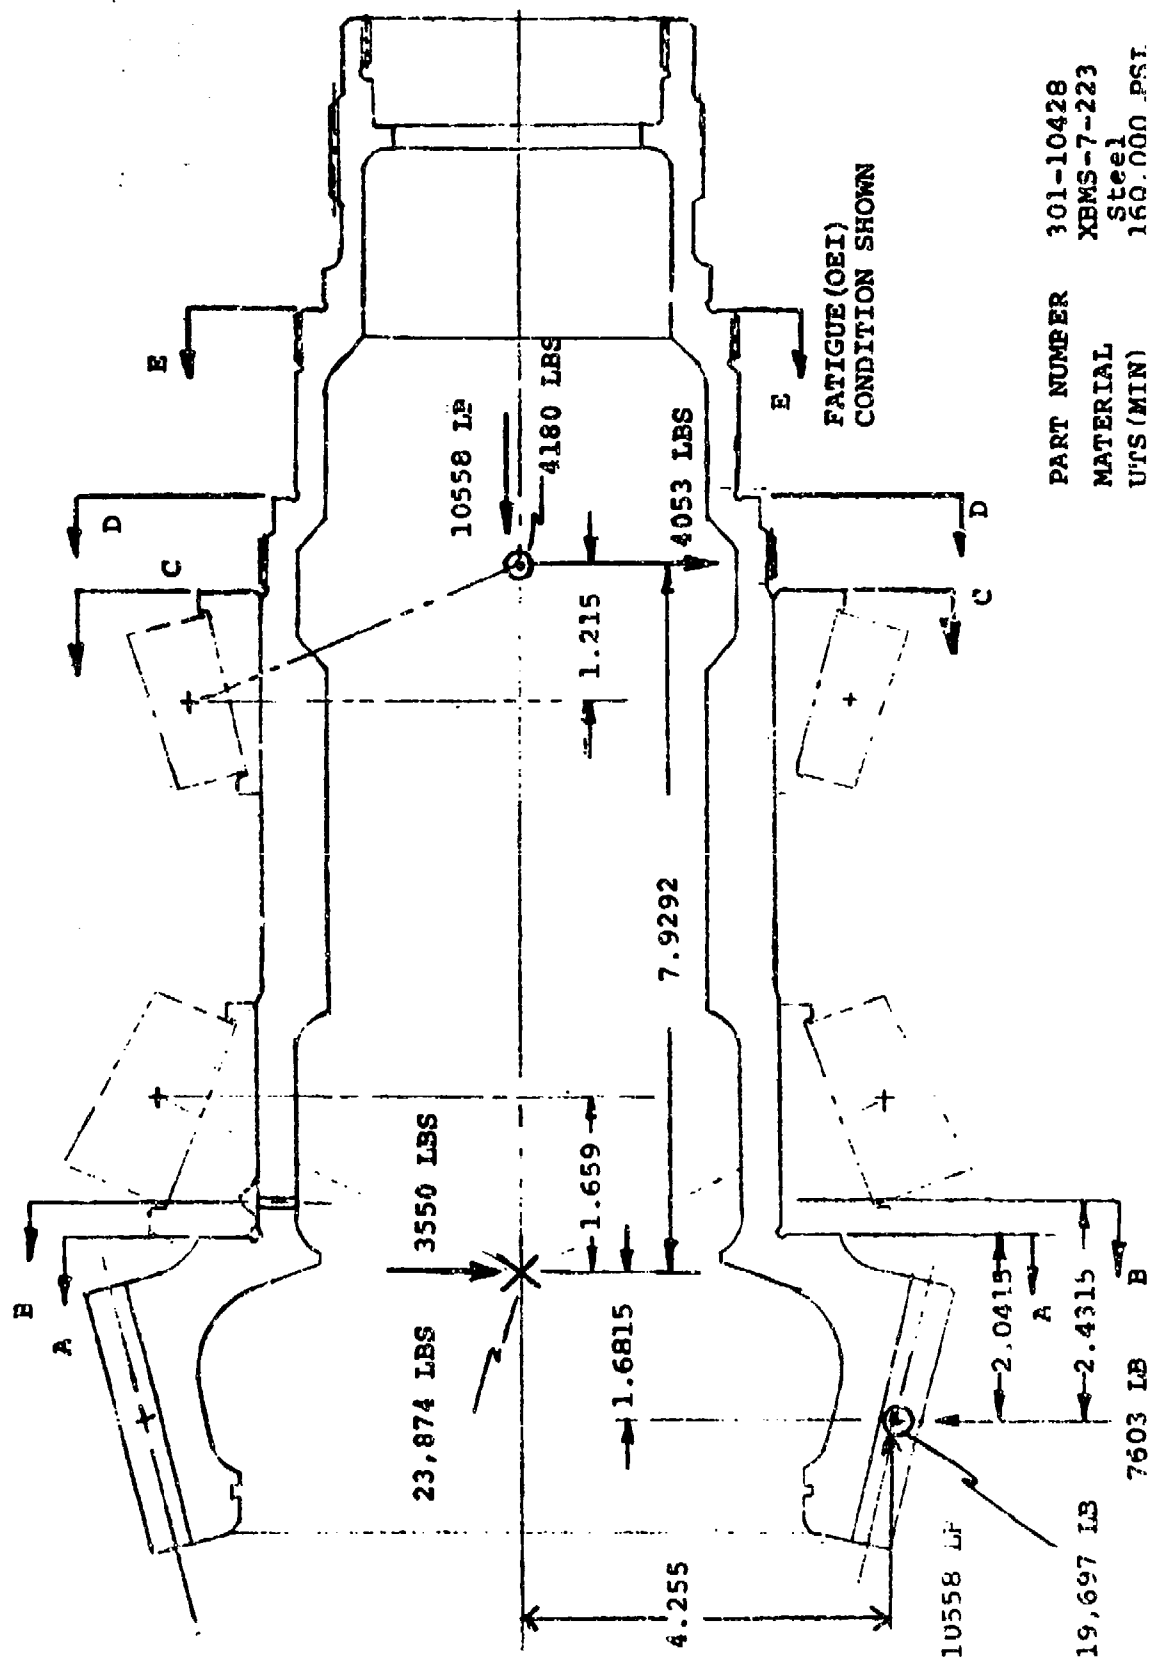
Gear, Spiral Bevel Pinion, Aft Transmission.
